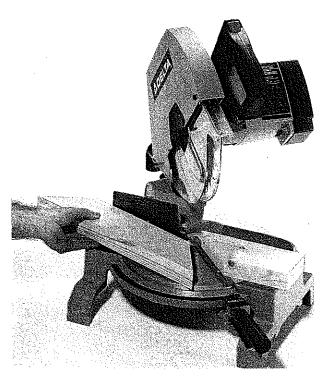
Power miter saws are used for accurate crosscut ting and mitering. (Delta International Machinery Corp.)
